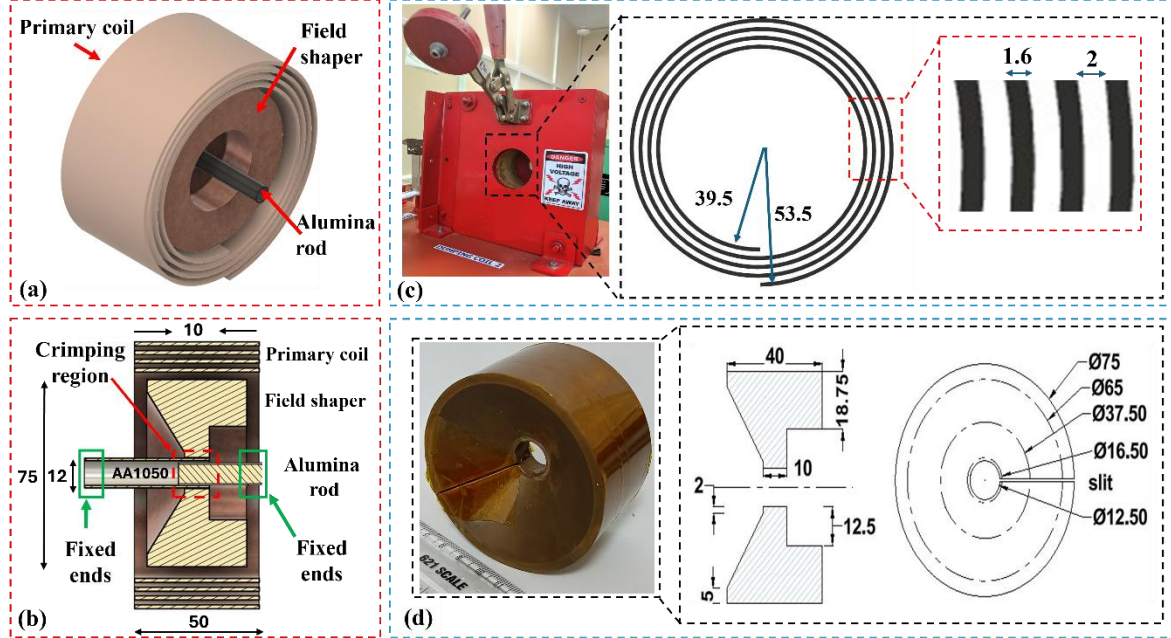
(a) Isometric, (b) front half sectional view of the arrangement, (c) Coil, and (d) Field shaper with detailed dimensions in mm.
